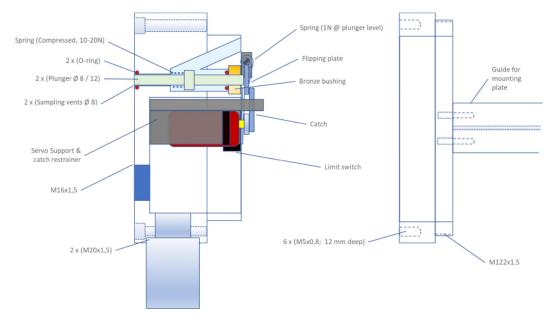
Sketch of Front Cover and Flange Cross-sections
